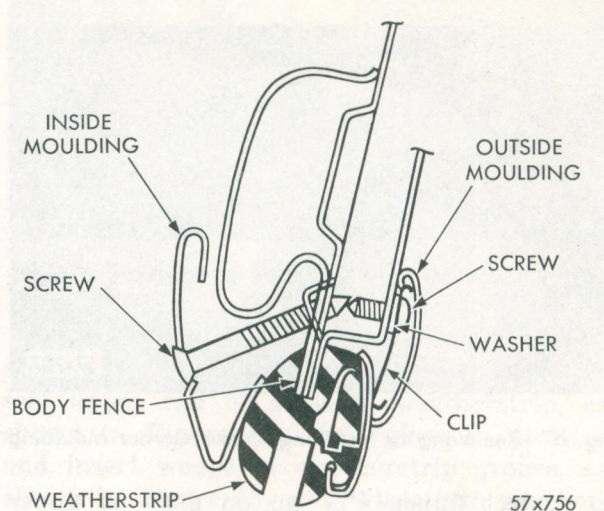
Lower Rear Window Weatherstrip and Moulding
